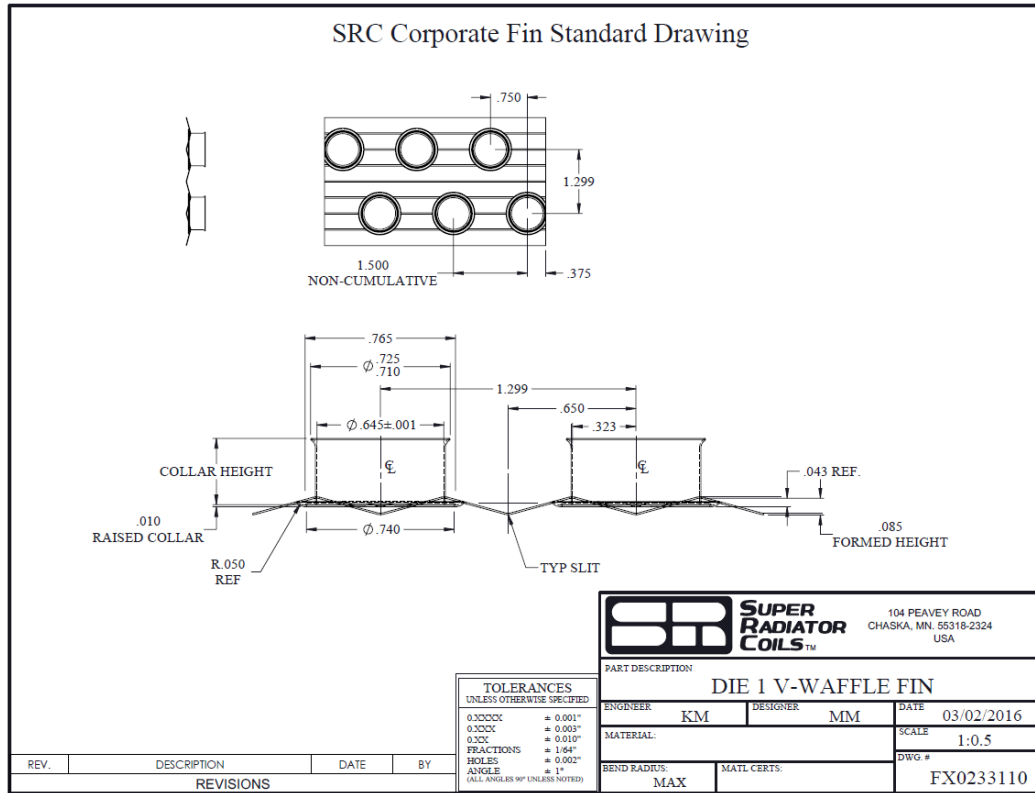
Engineering drawing of corrugated-fin with tube collars
